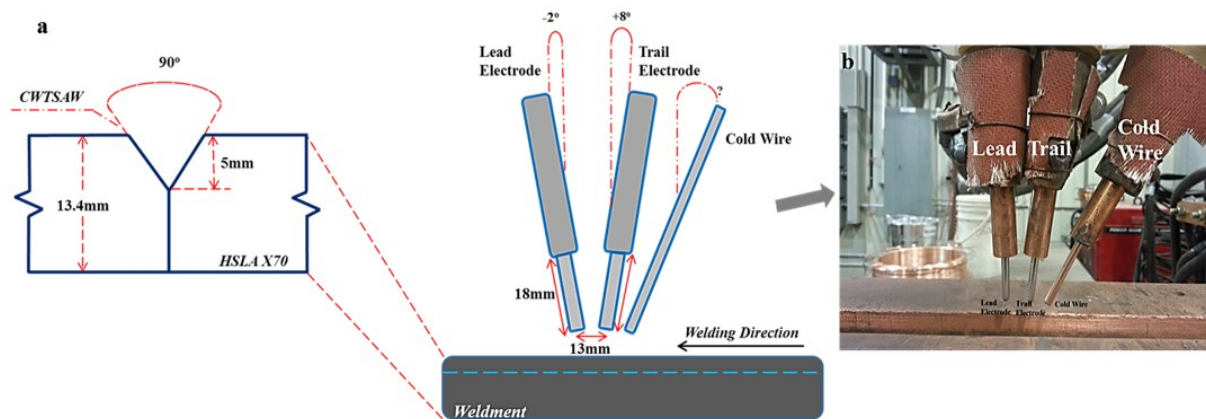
CWTSAW process setup. (a) Schematic view of fixed welding variables and weldment geometry. (b) Actual welding setup.
